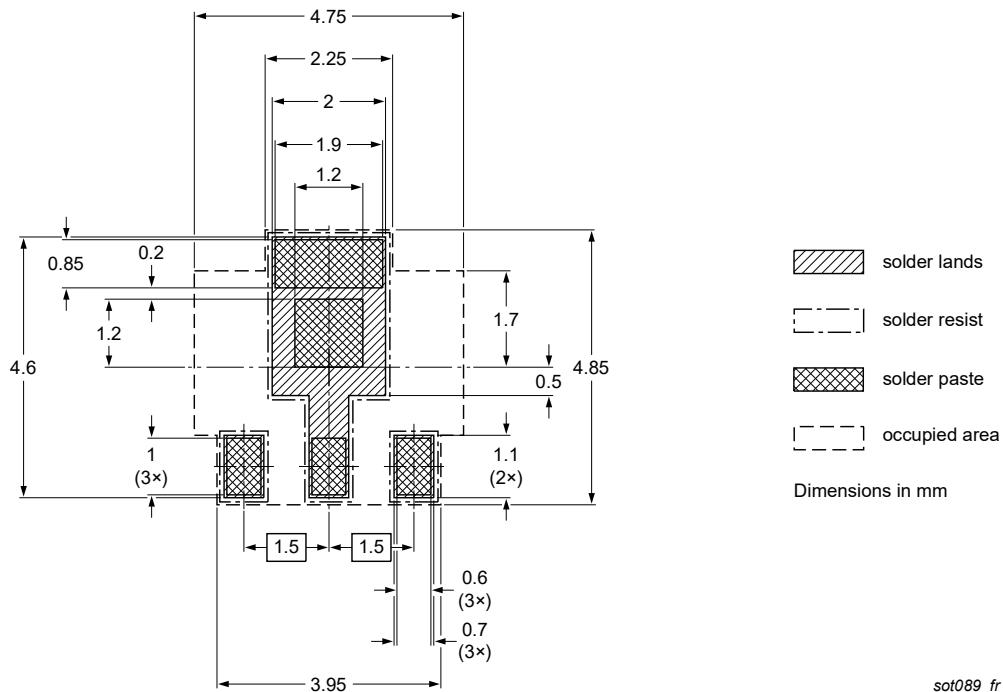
Reflow soldering footprint for SOT89 (SC62)
